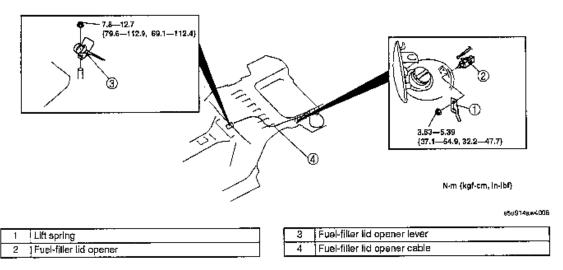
Identifying Fuel-Filler Lid Opener Remove/Install Components With Torque Specifications
